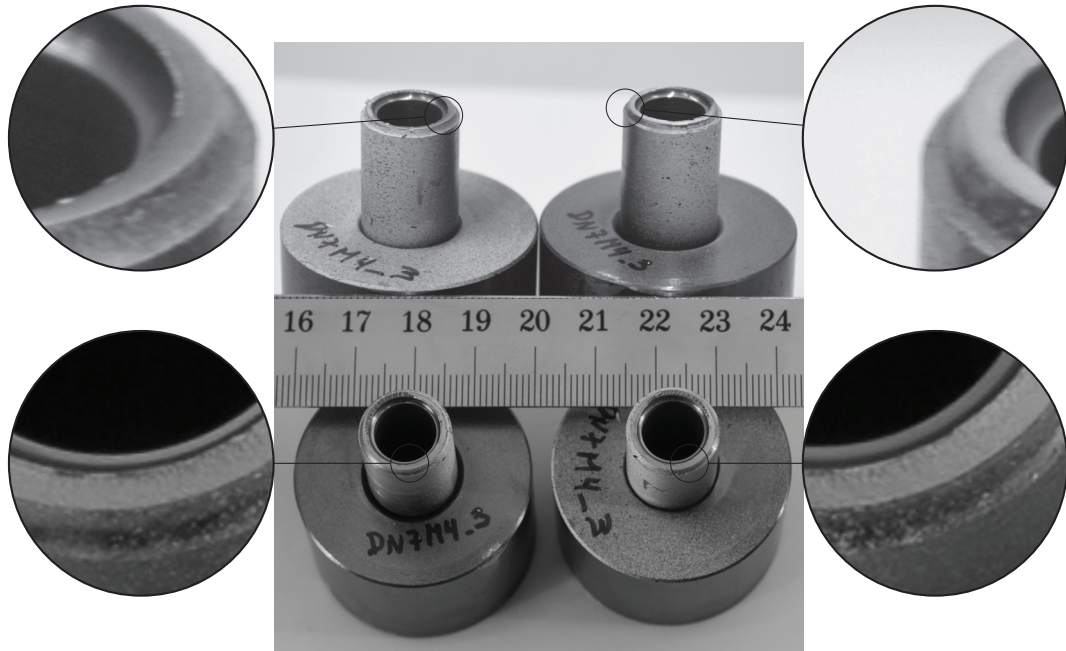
Fracture surface in monotonic load path 4 in double notched specimens
